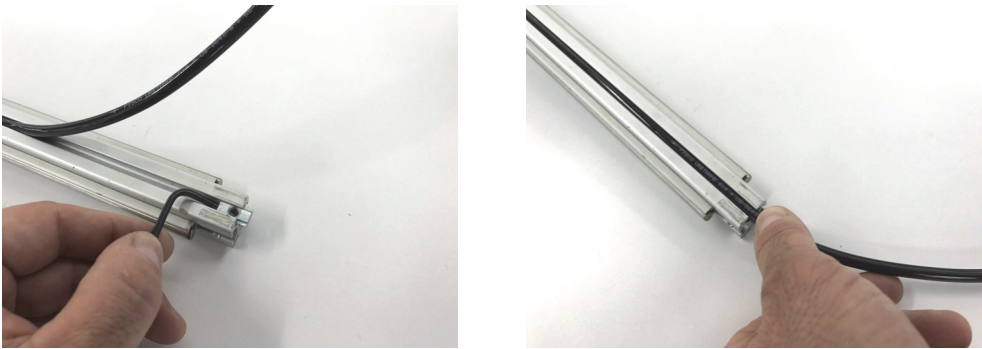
Removing the nut (*left*) and feeding the tube to the frame end (*right*)
